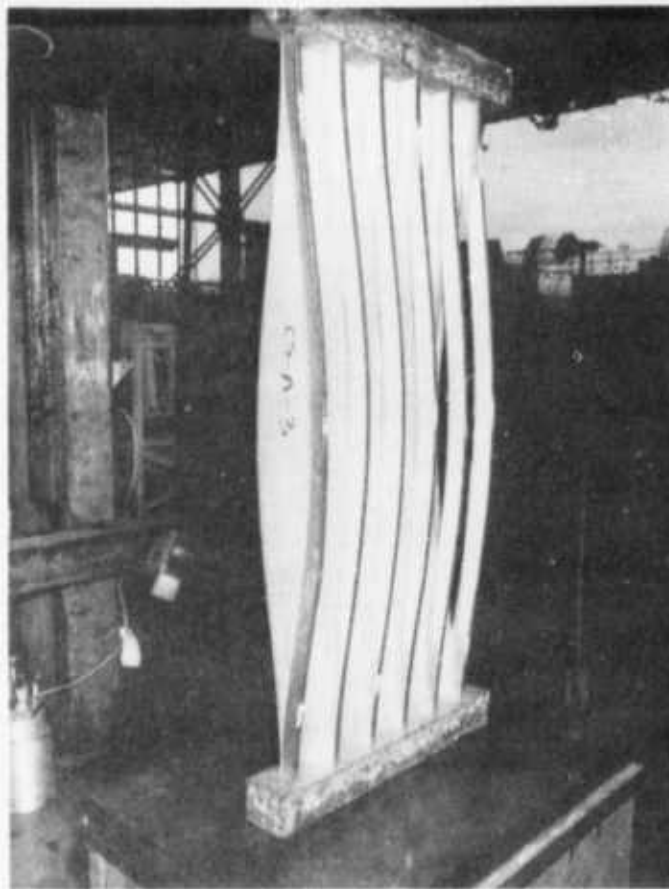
TYPICAL FAILED ADHESIVE BONDED COMPRESSION STABILITY PANEL
